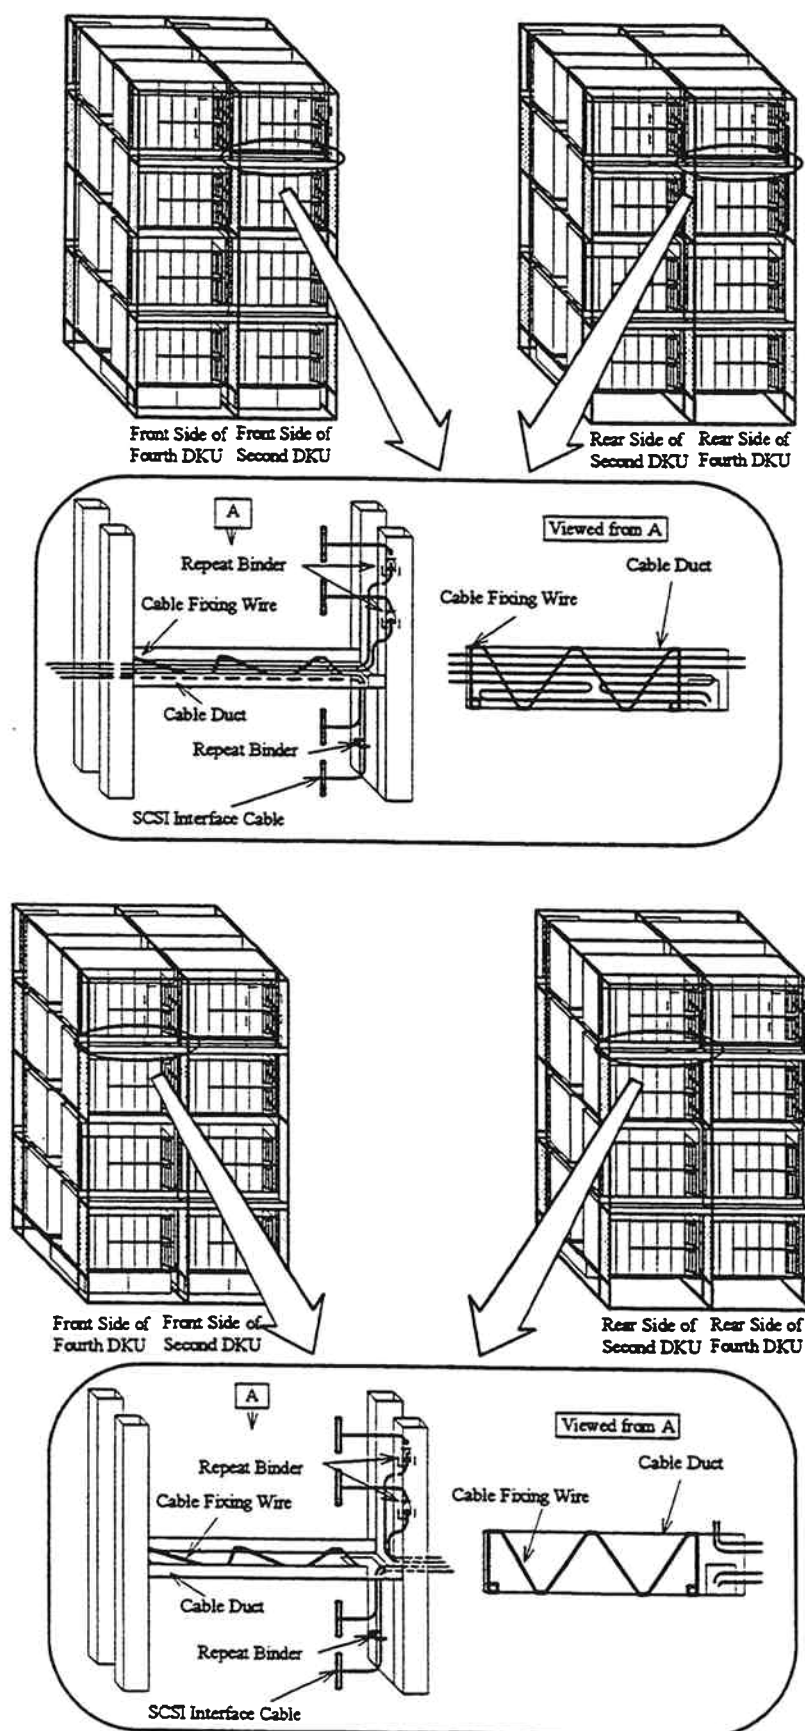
Removal of the SCSI Interface Cables
